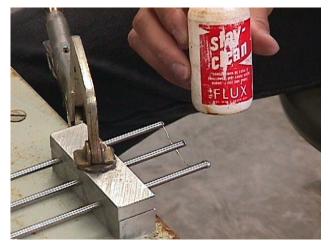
An alternative to a wood block for holding the rods during soldering is a machined aluminum clamping device. The wire between the outer rods has been soldered.
